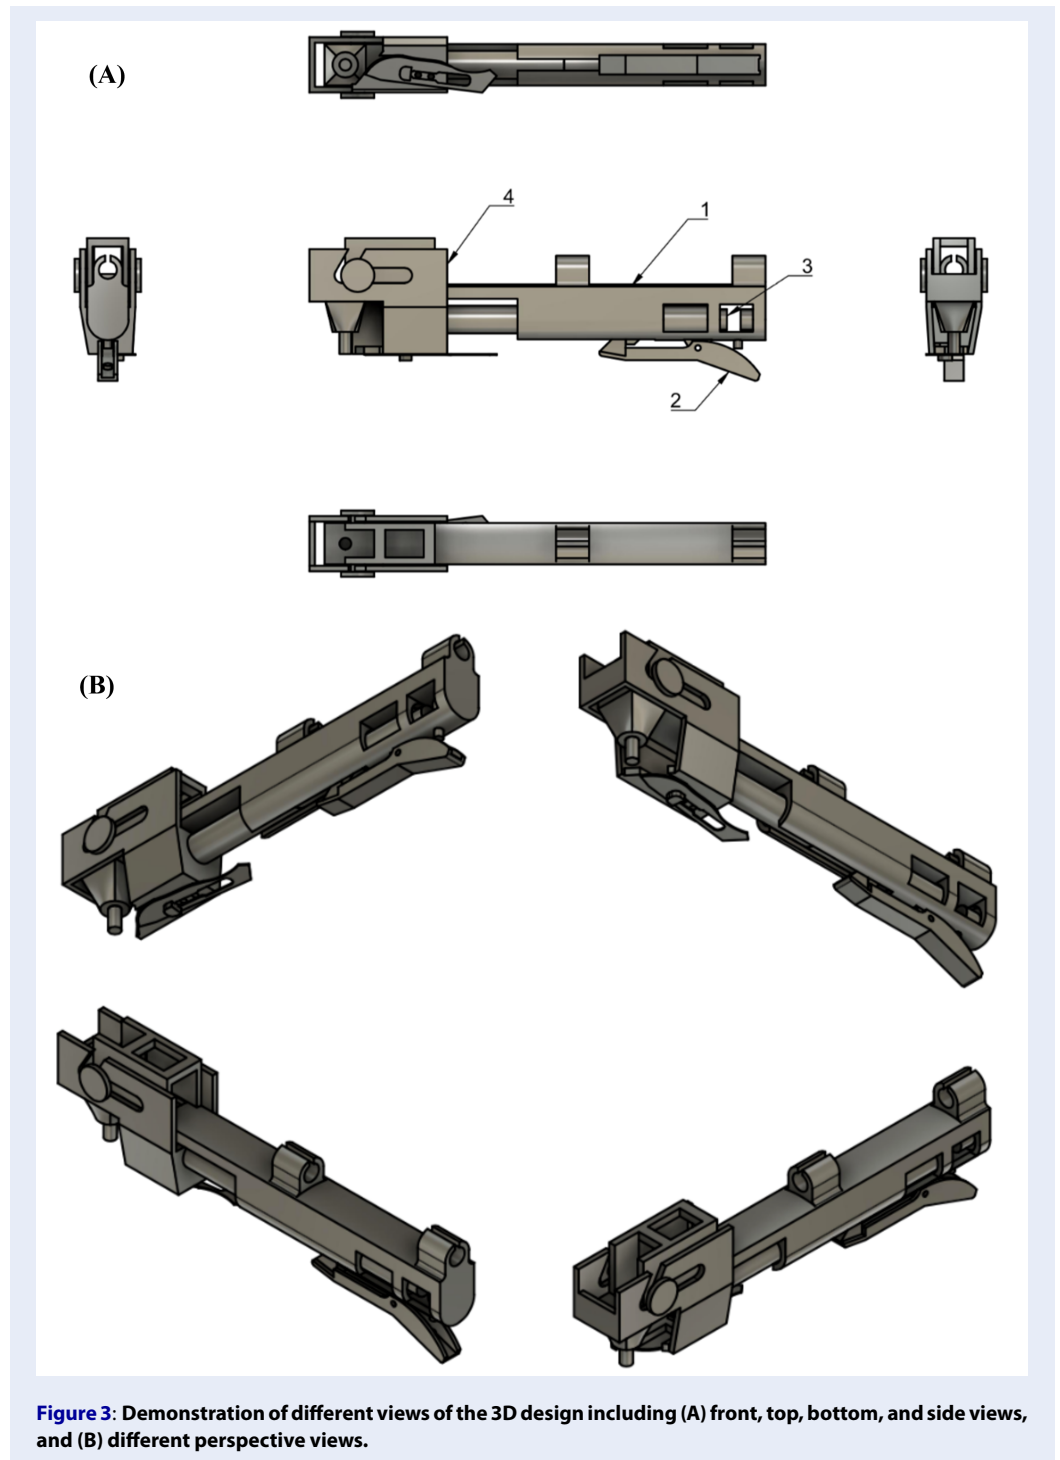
Demonstration of different views of the 3D design including (A) front, top, bottom, and side views, and (B) different perspective views.
